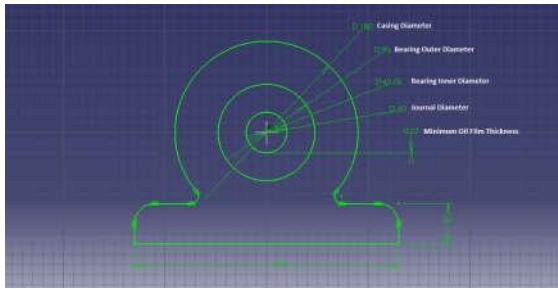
2D drawing of Hydrodynamic Journal Bearing
